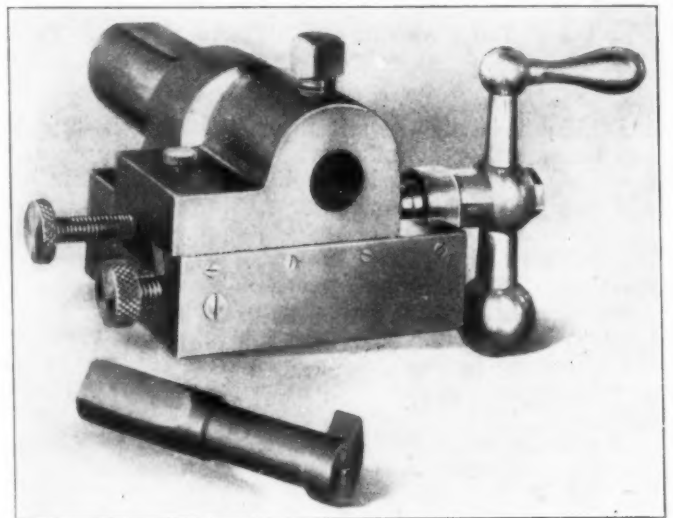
A. TOOL USED IN TAPPING SOCKETS.
